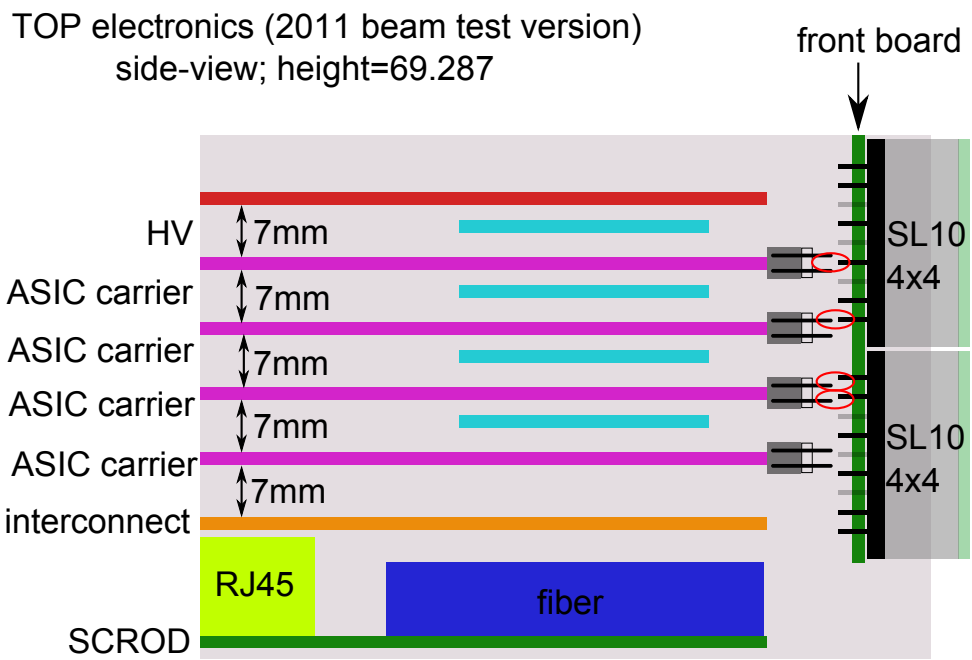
side view of single iTOP electronics module with 7mm board-stack connectors; the conflict is not resolved (conflicts indicated in red)
